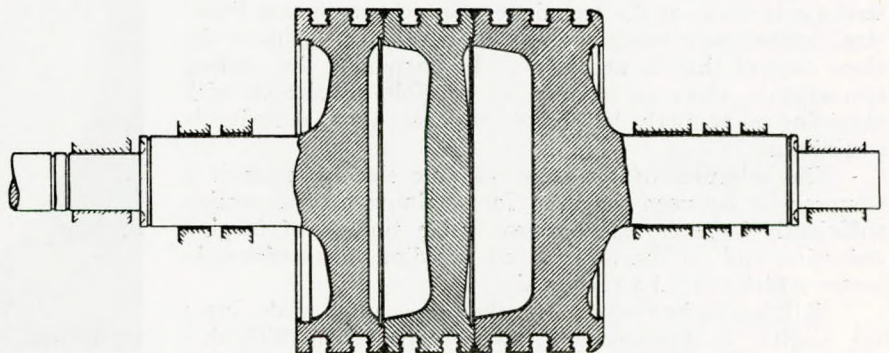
Example of composite welded rotor (Brown-Boveri Co.).
